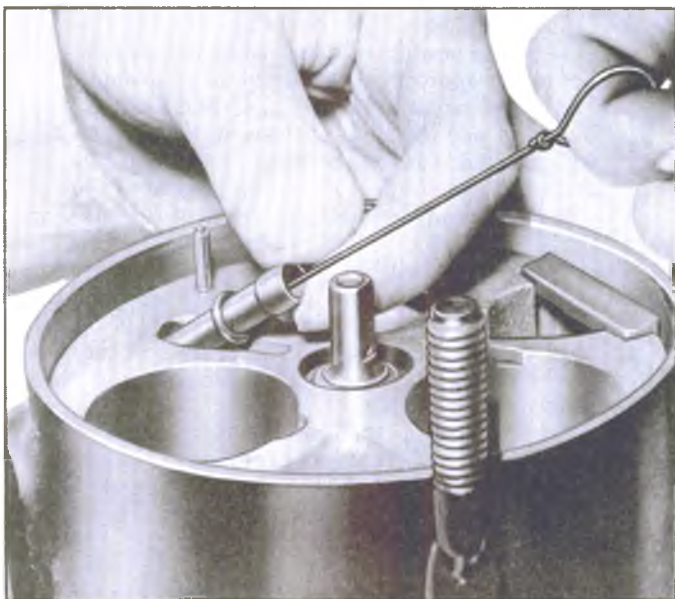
Removing Oil Inlet Tube and "O" Ring
